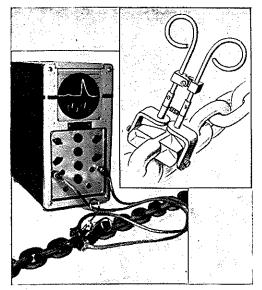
Ultra-sonic flaw detector showing (inset) probe-heads applied to butt-welded chain links.
